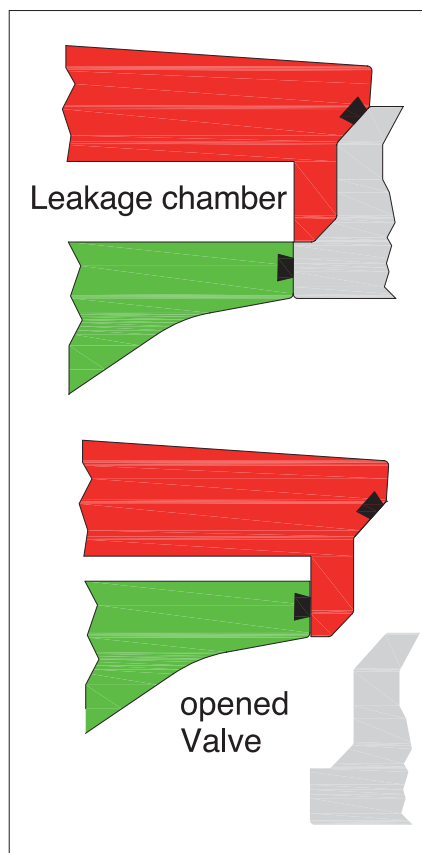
Example of a schematic of a leakage-free double-seat valve. The bottom plate (green) seals radially. Upon opening, it moves to the top against the top, axially-sealing plate (red) with a metal stop and seals the leakage chamber. Then both plates open the valve (bottom schematic).
